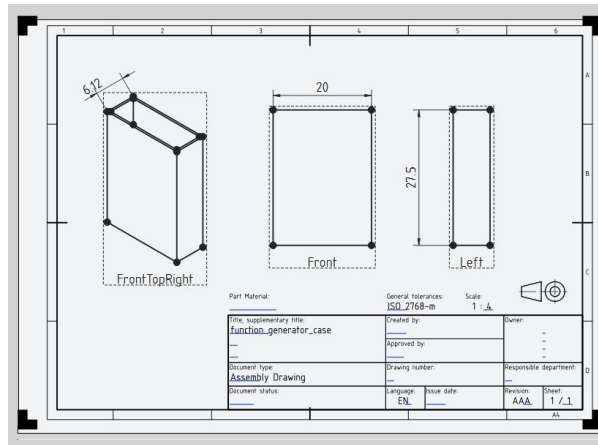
Drawing of Outer Casing(Produced using FreeCADweb)
